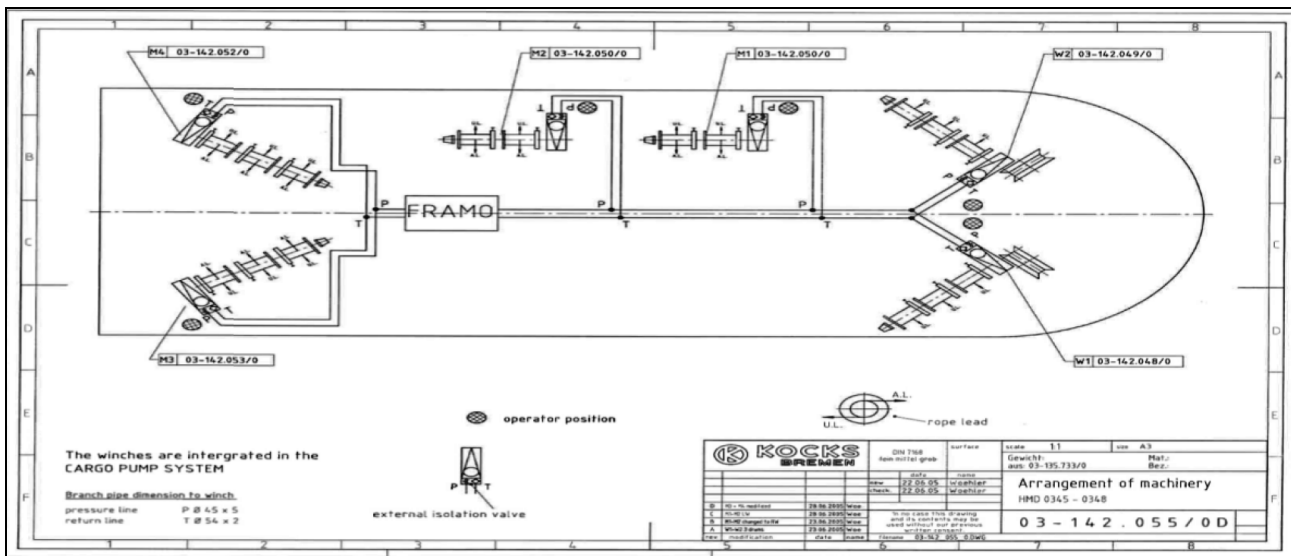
/1: The mooring equipment machinery arrangement.
